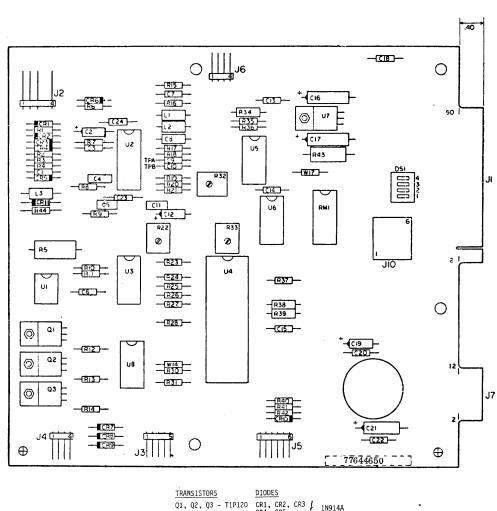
B. ASSEMBLY AND PARTS LIST (PWA 77644650)
